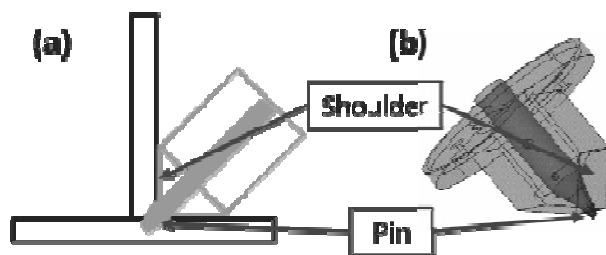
(a) sketch of the FSW of corner joints and (b) CAD image of the developed tool.
